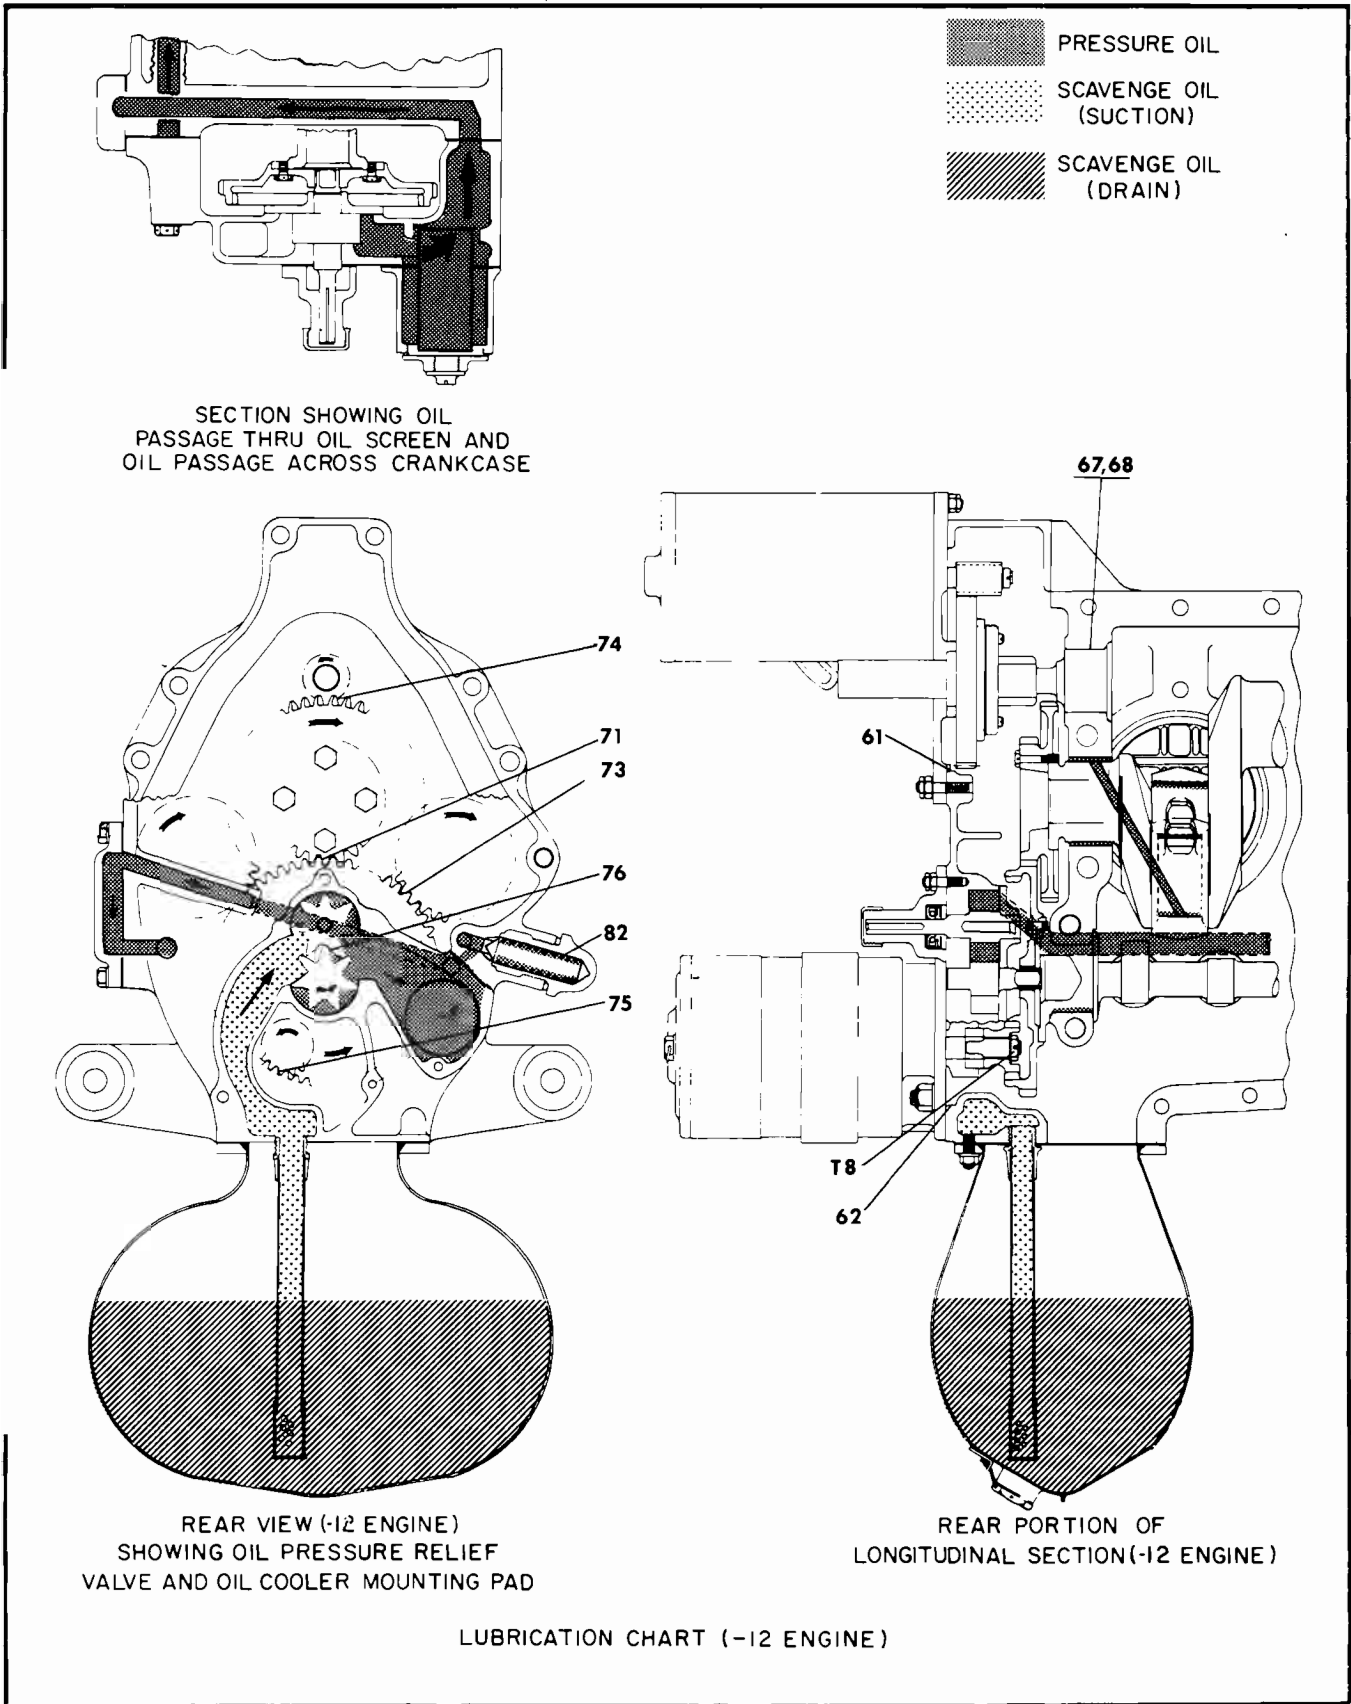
Limits and Lubrication Chart (Sheet 4 of 4) - Rear View and Sections, -12, -14, -16 and O-200 Models.
